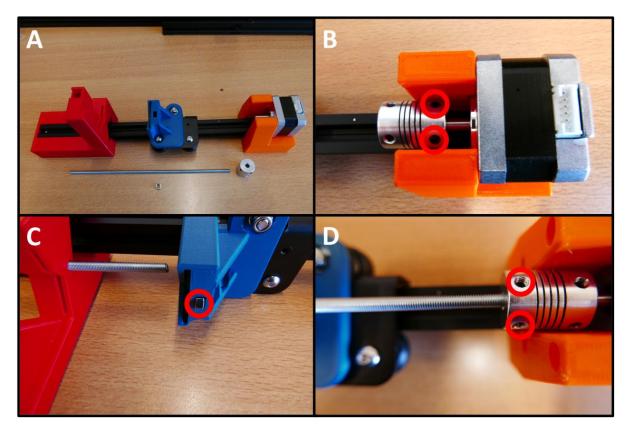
Installation of the threaded rod and shaft coupler. A) All components laid out. B) Shaft coupler installation. C) Fixing the threaded rod to the E Slide Mount using an M5 nut. D) Threaded rod clamped in the shaft coupler.
